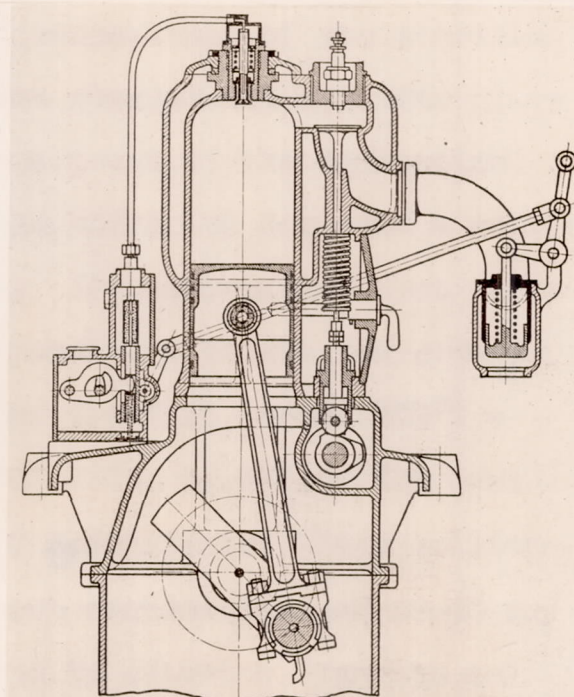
Bellem and Brégeras heavy-oil carburetor engine.
